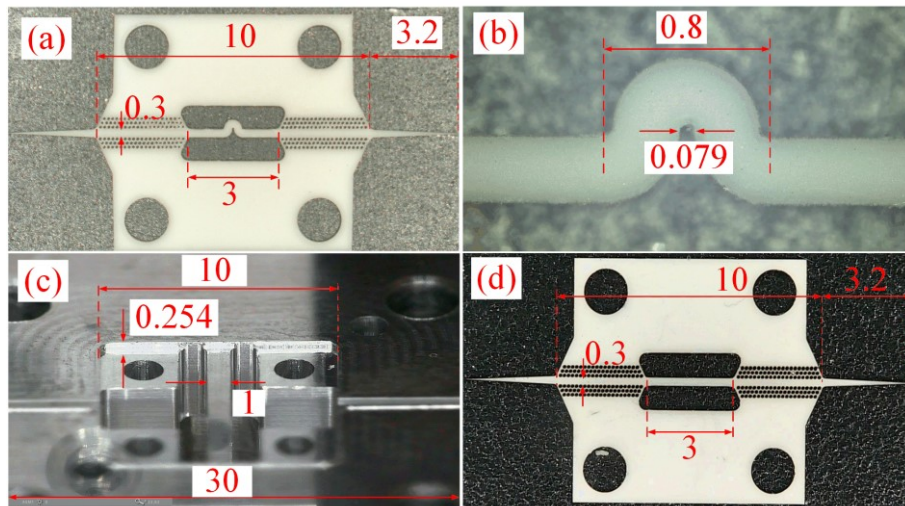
Photograph of the alumina based guiding structure with bends, (b) picture of bends, (c) two pieces of the aluminum housing, base and cover, (d) photograph of the standard back-to-back straight waveguide. Unit in mm
